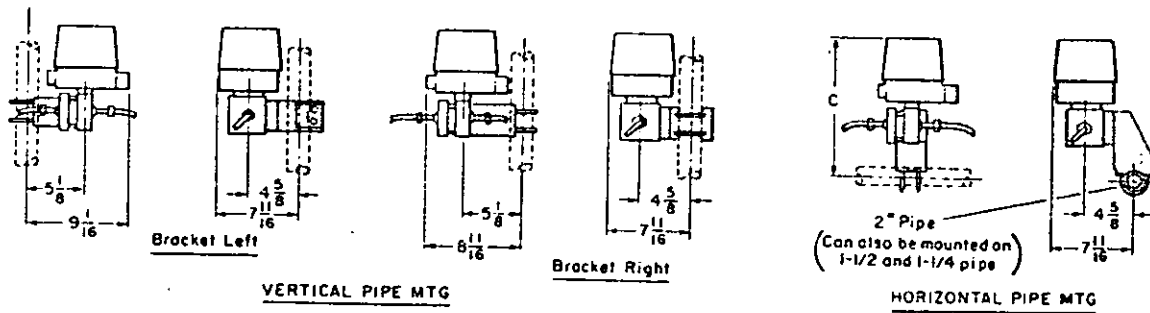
Mounting Dimensions for Transmitter with Bolted Cover
